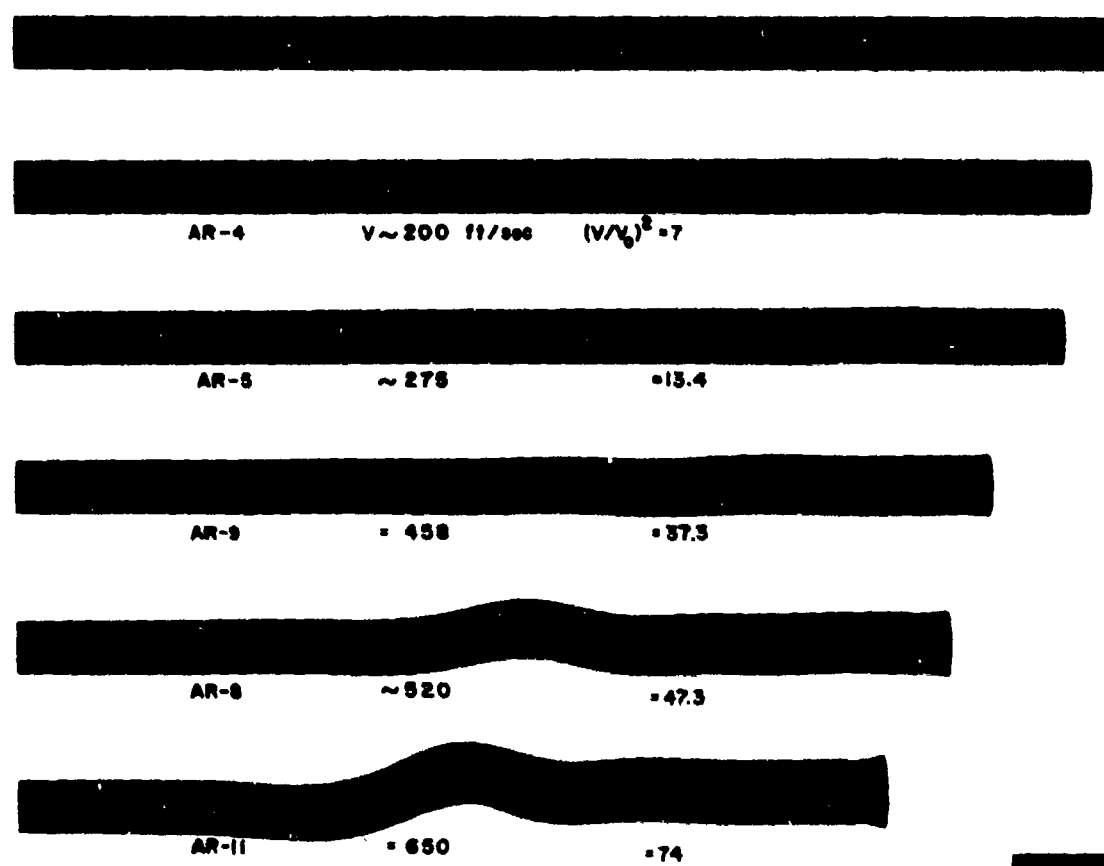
ALUMINUM (6061-T6) RODS BUCKLED BY LONGITUDINAL IMPACT
